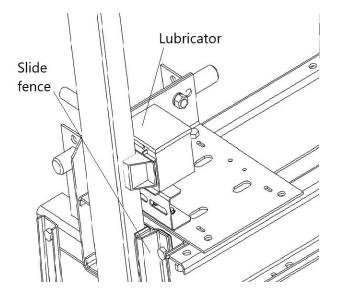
Typical way of mounting the guide lubricator on the upper part of the cabin frame
